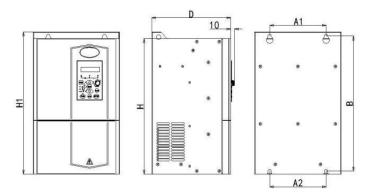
Schematic of 18.5kW~110kW external dimensions and installation dimensions
